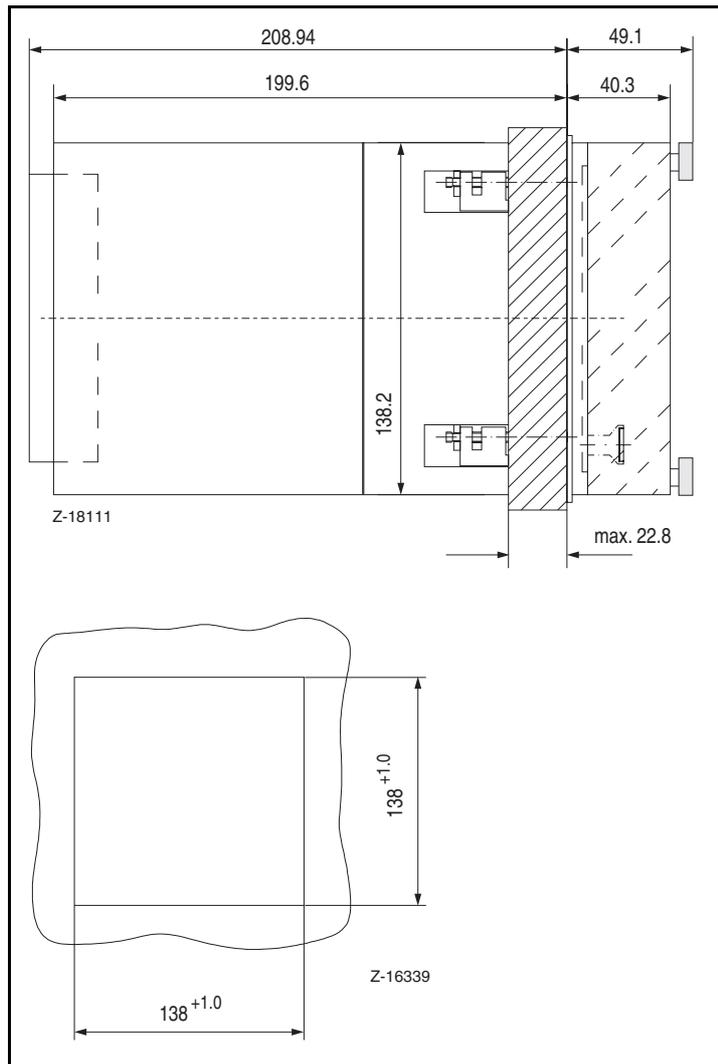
Dimensional drawing of control panel case (dim. in mm)
